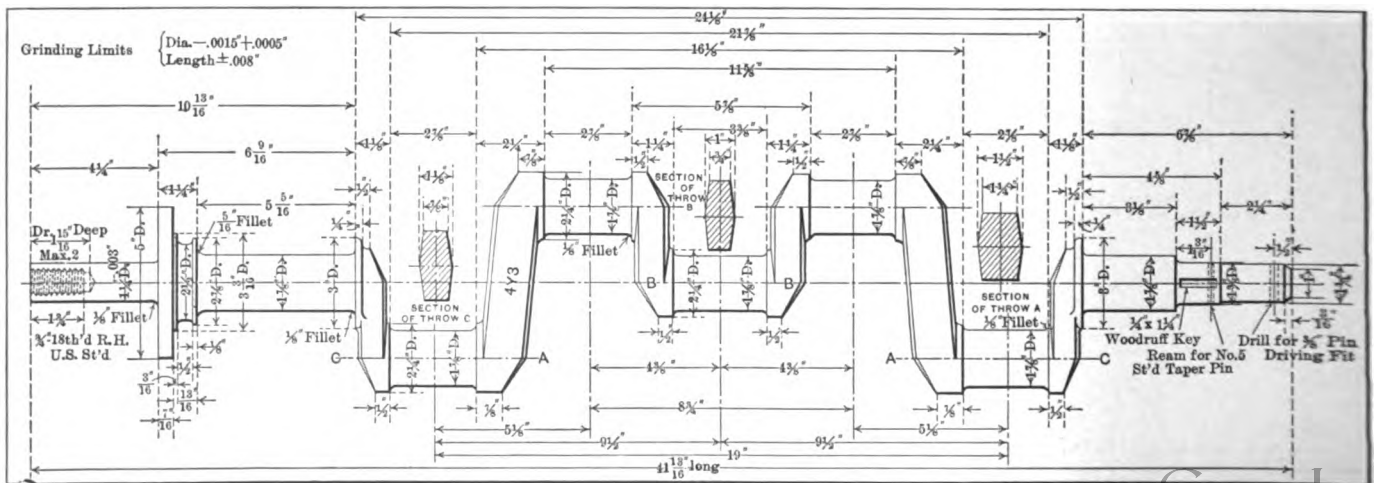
Crankshaft of the Selden engine, showing liberal diameters and lengths with compactness and light weight
